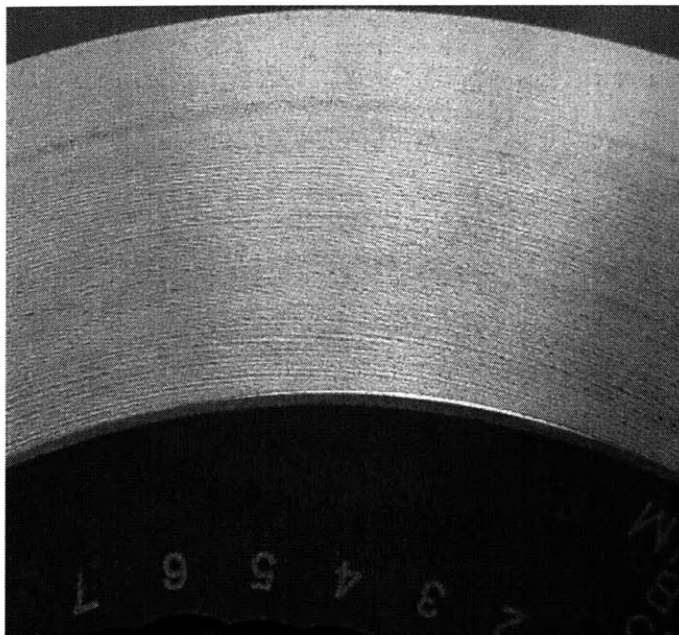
Prototype 2: output 70 μ -inch surface finish at 0.015" depth of cut per side
